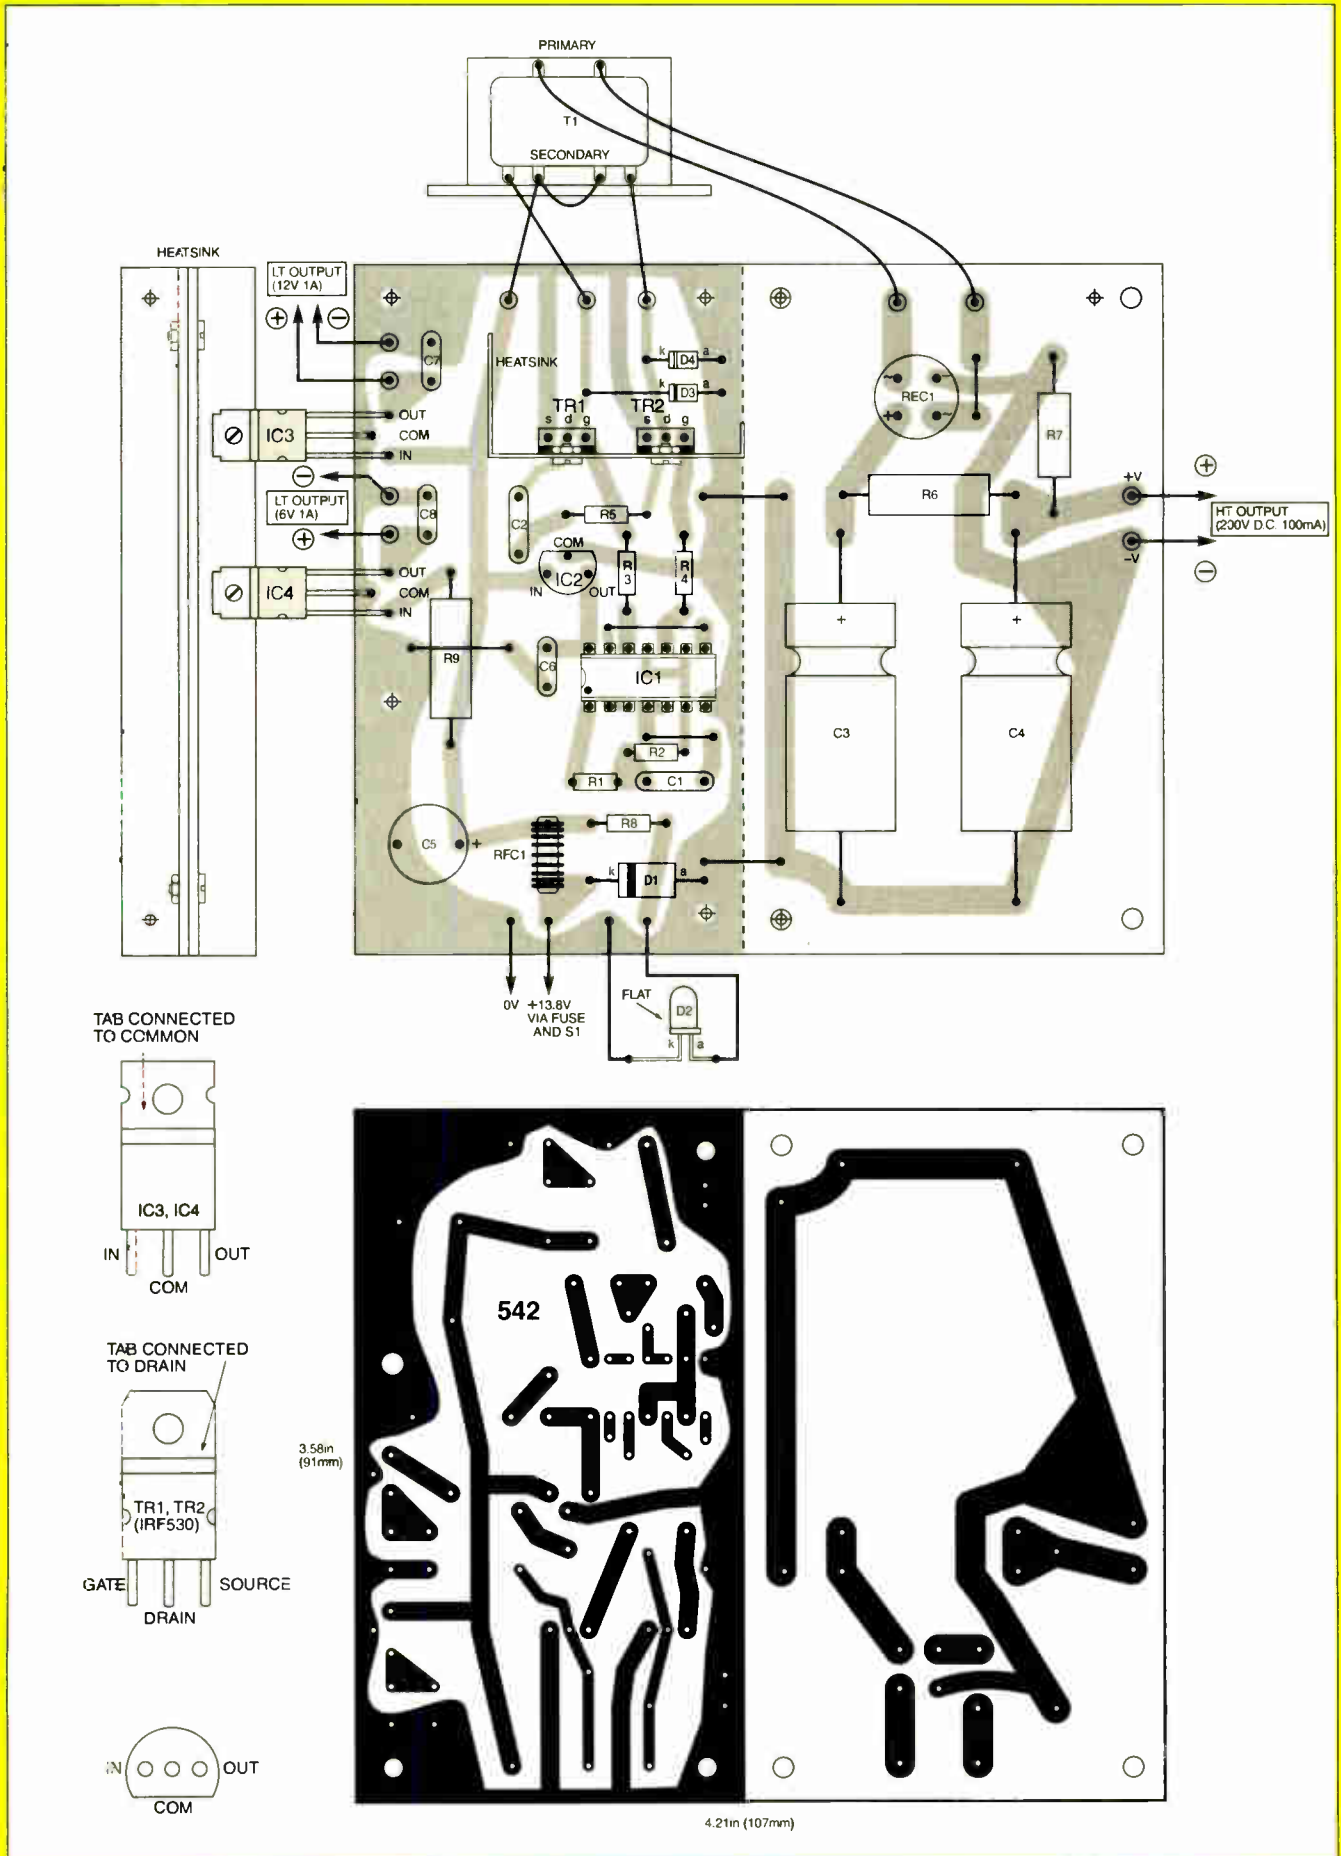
Printed circuit board component layout, wiring and full-size p.c.b. master for the Solid-State Valve PSU
